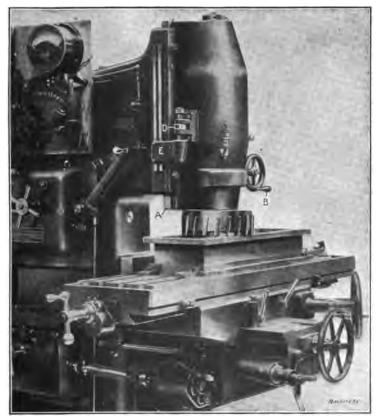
Finishing Top Surface of a Casting on a Cincinnati Vertical Machine
